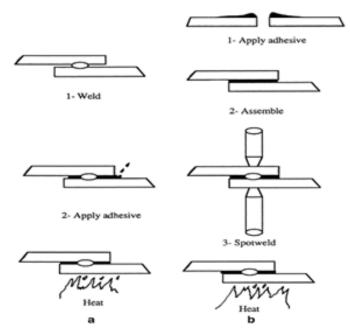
Stages of the hybrid joining (welding–adhesive bonding) process [2]: flow-in method and b) weldthrough method
